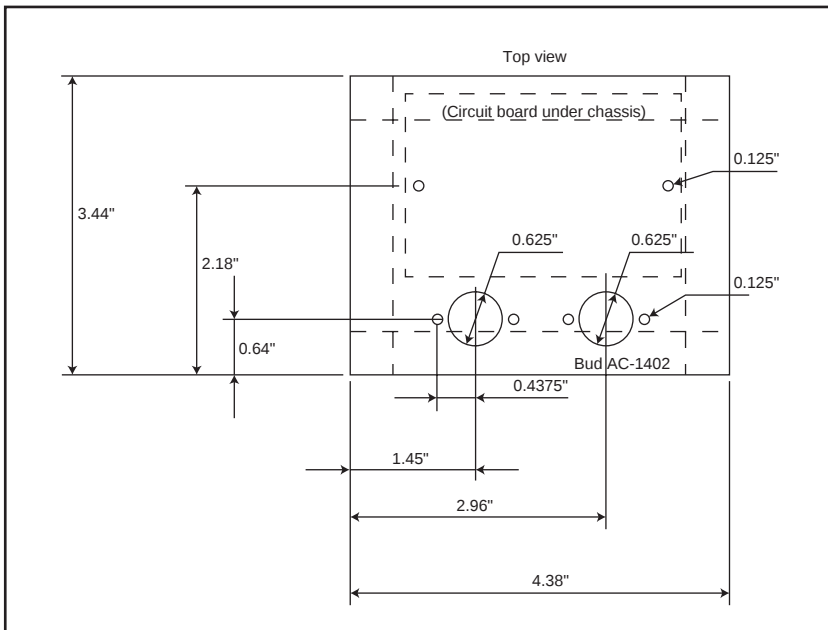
This is the layout for the chassis with tube sockets and other circuitry.
